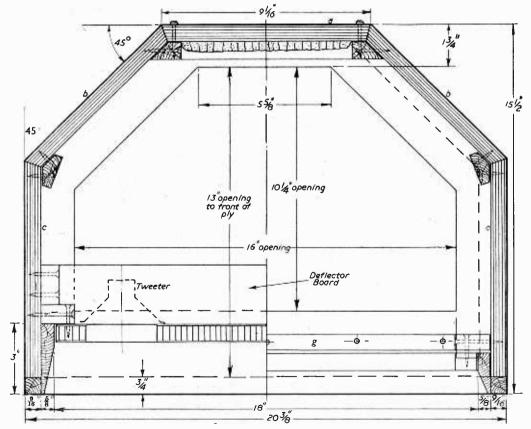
Plan view at top and bottom of baffle board. (Note: The thickness of the bevelled edge at the front of the cabinet is $\frac{3}{3}$ in.)
